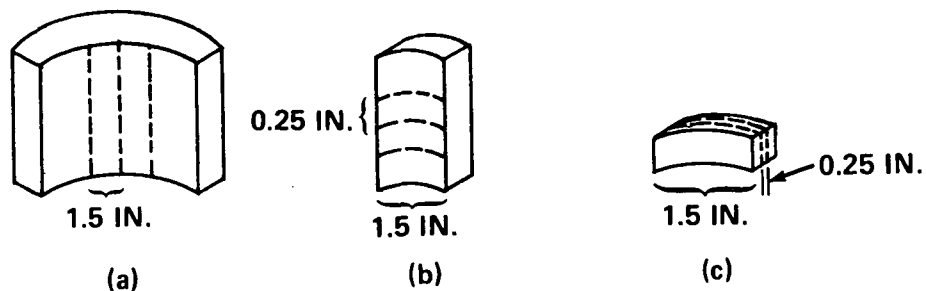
Machining of specimens for short beam shear strength measurements. Cutting of 1.5 in. dimension (a), 0.25 in. width (b), and 0.25 in. thickness (c).
